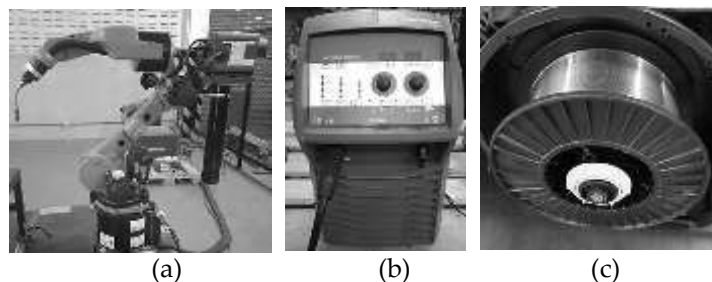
The equipment used in the experiment (a) 6-axis Robotics (b) Welding machine and (c) Wire measuring 1.2 mm
